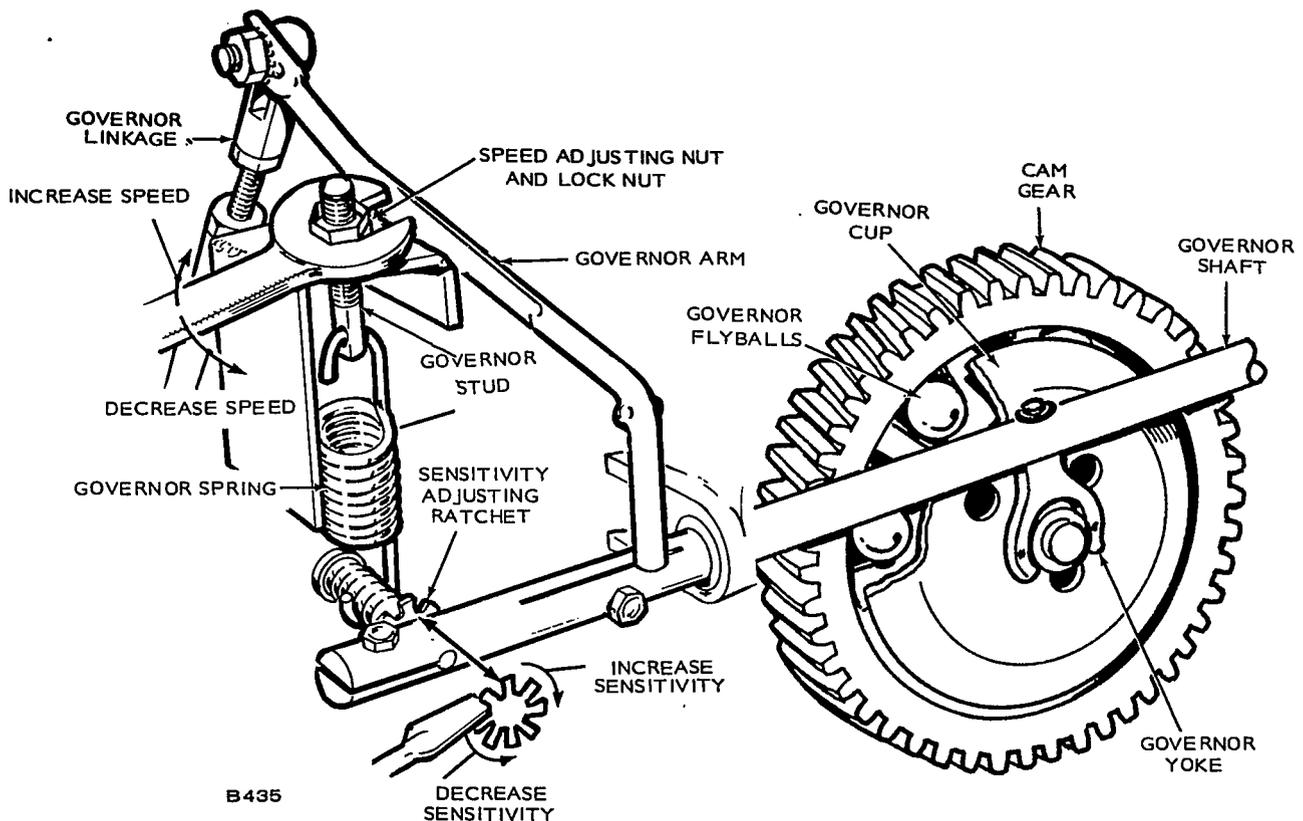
GOVERNOR ASSEMBLY AND ADJUSTMENTS
